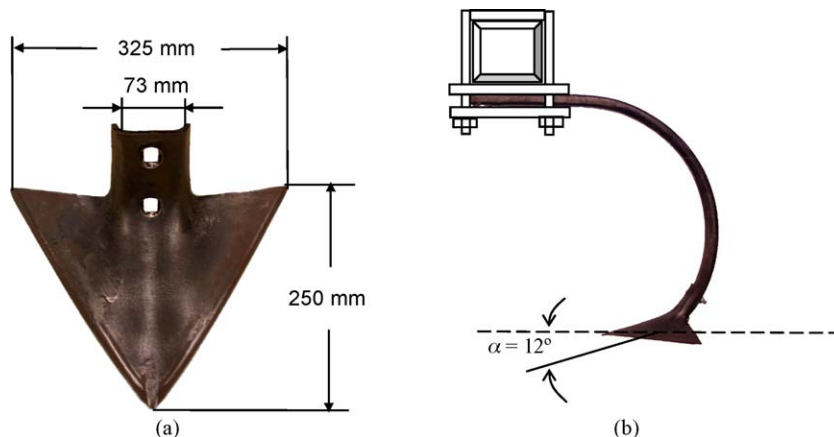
Tool configuration: (a) the sweep (McKay 50-12K); (b) the sweep and shank.
